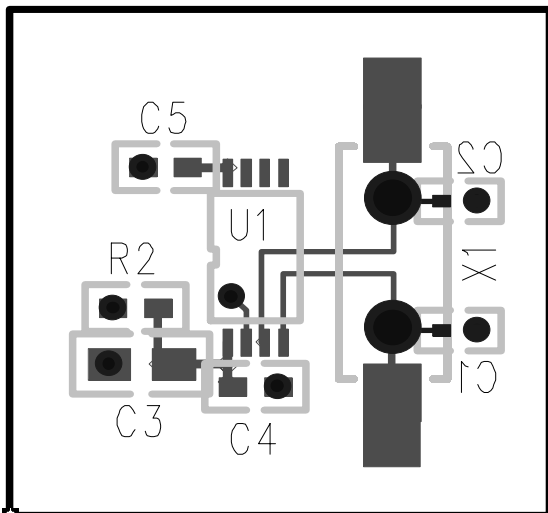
B. ICS843051 PC BOARD LAYOUT EXAMPLE
